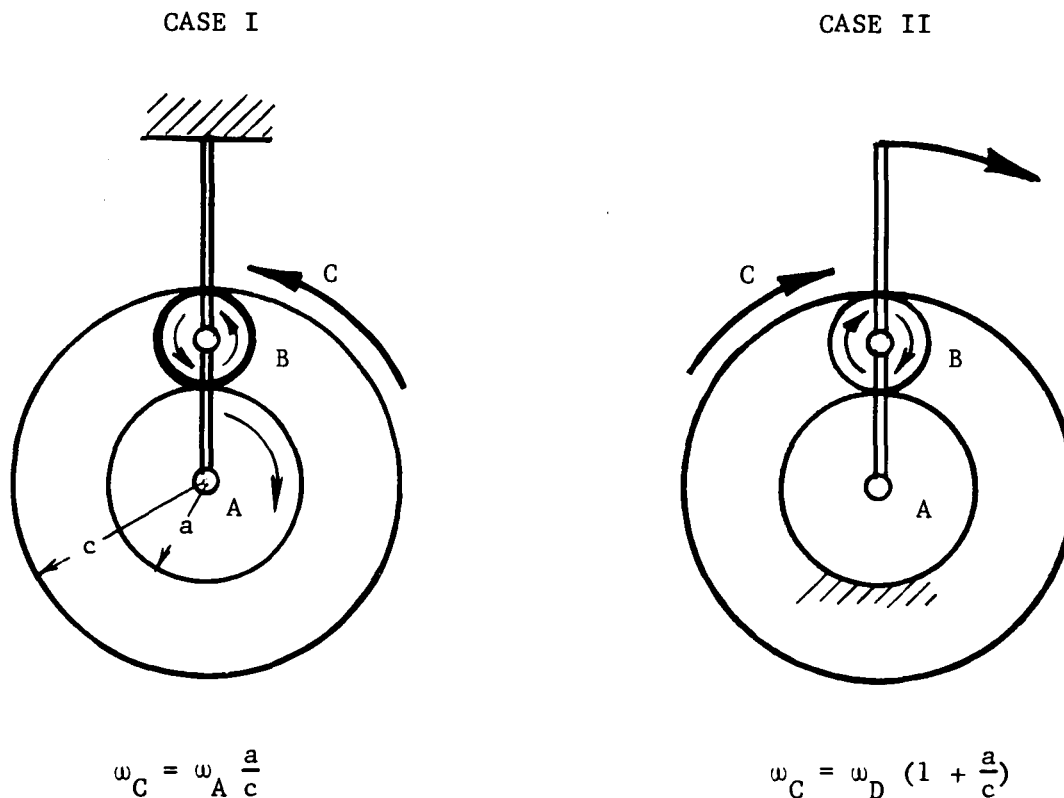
PLANETARY GEAR SCHEMATIC.
